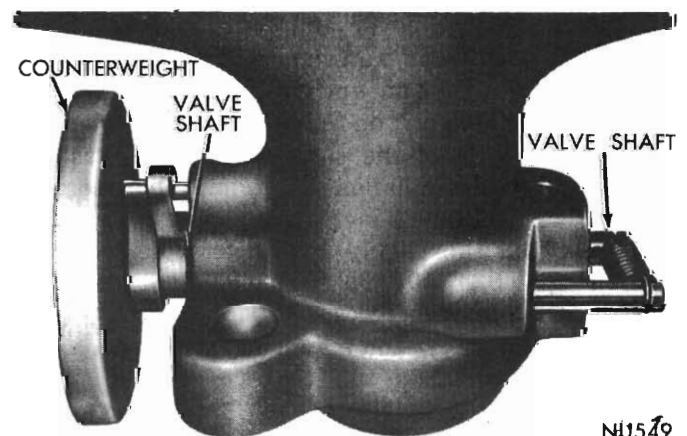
Exhaust manifold heat control valve (Typical view)
